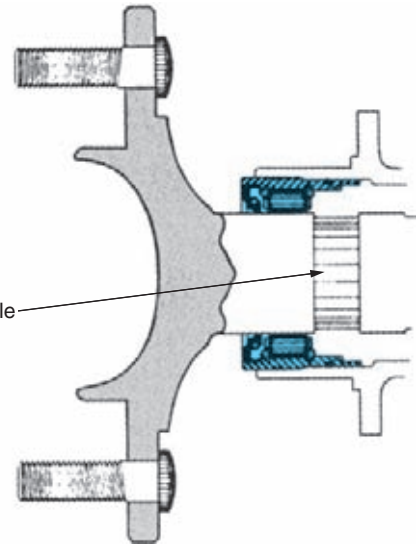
Axle bearing failure on a C-lock axle can ruin the axle. This bearing and seal assembly moves the bearing sideways, allowing an unworn portion of the axle to be used as the inner race. (Courtesy of CR Services)
